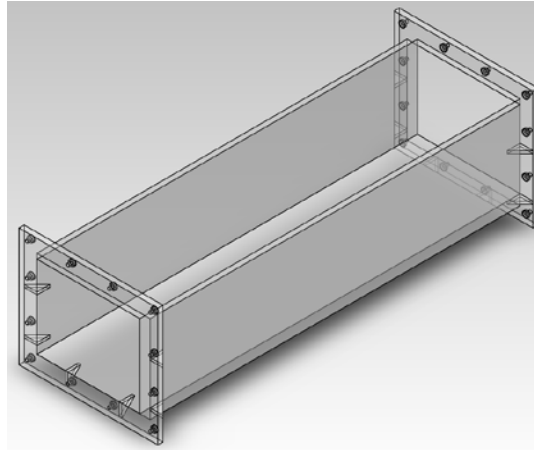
Solidworks Drawing of Viewing Section. Cross Sectional Area of 80in<sup>2</sup>
